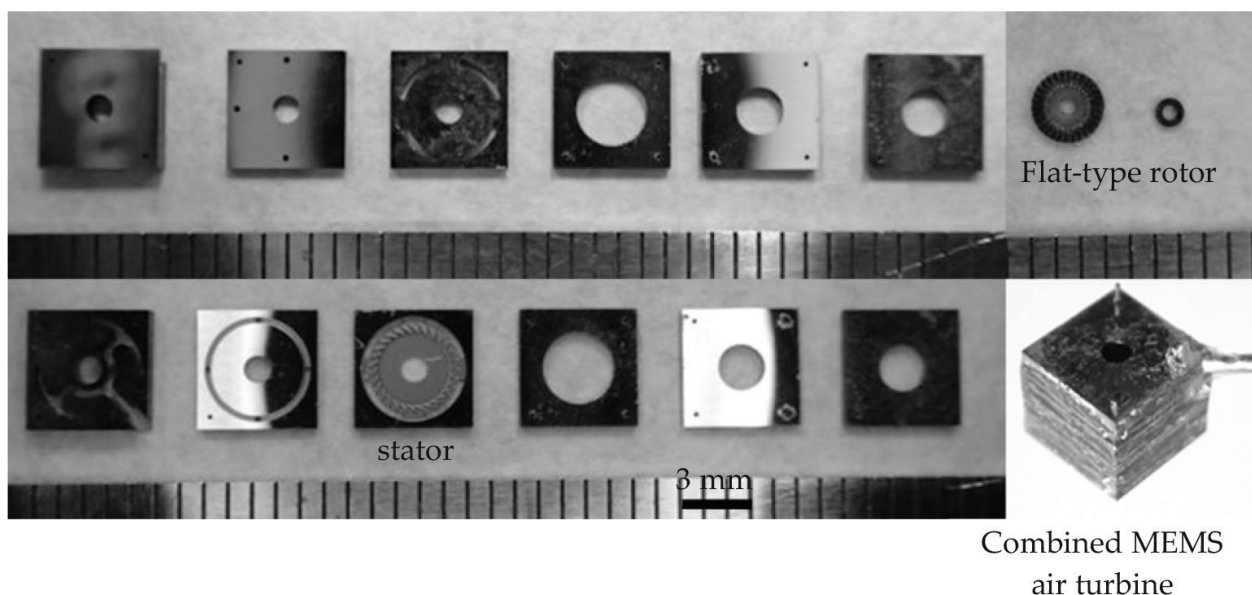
Fabricated components and assembled structure of flat-type rotor blade air turbine.
